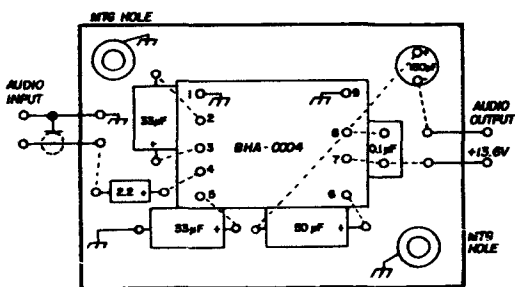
Suggested layout for a printed-circuit board (not to exact scale). The layout is very flexible and can be modified to suit the parts on hand.
